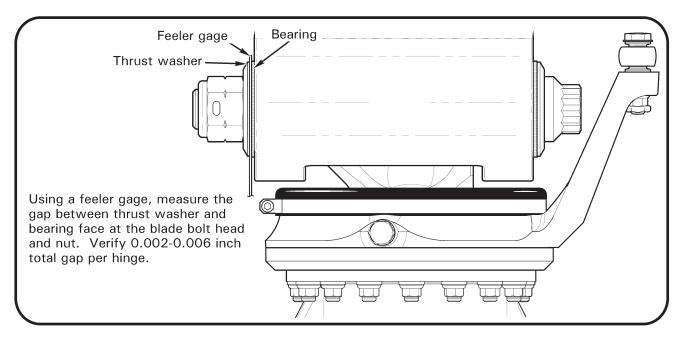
MEASURING CONING HINGE AXIAL GAP
